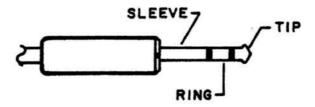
Tip-Ring-Sleeve Plug Outline Drawing.
